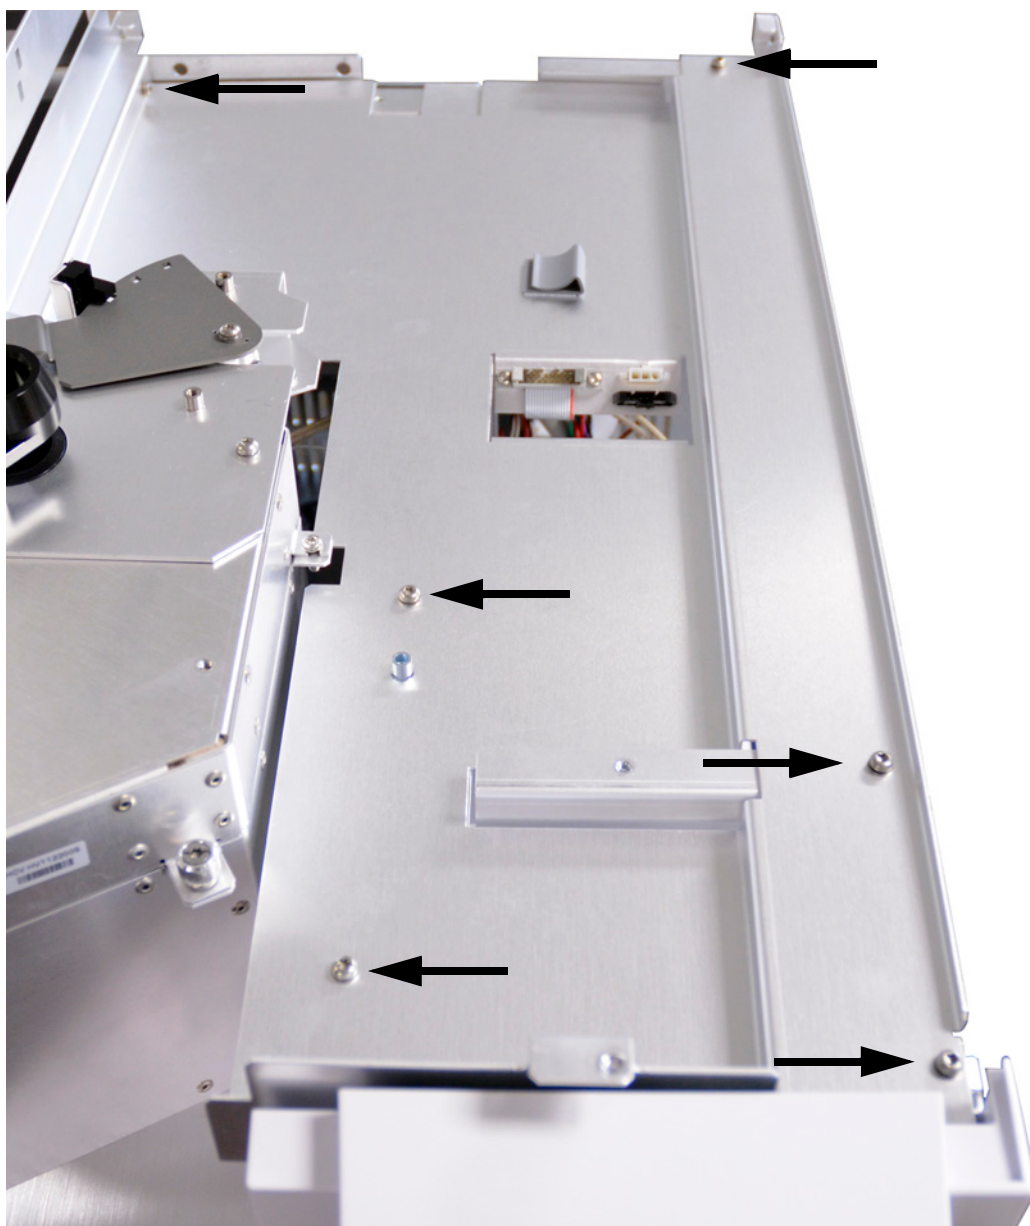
Install T-20 Torx screws to secure the top instrument cover to the headspace
